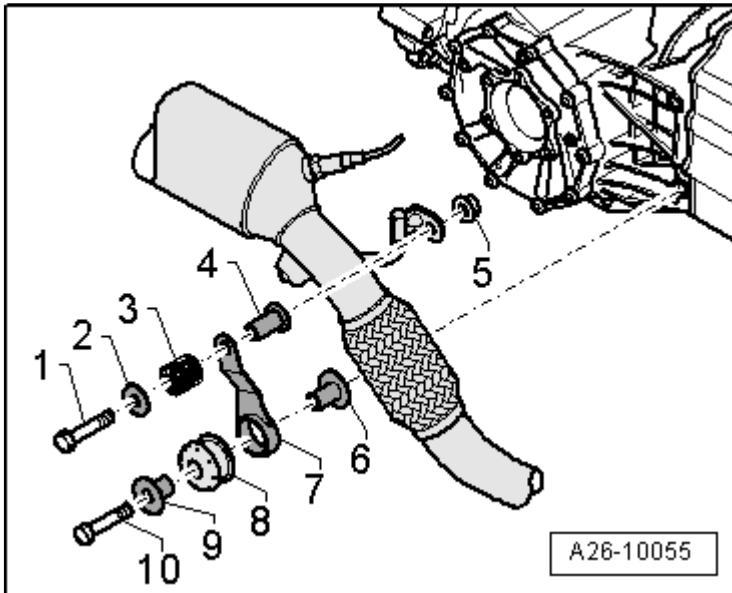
Removing Bolt At Left Bracket For Front Exhaust Pipe
